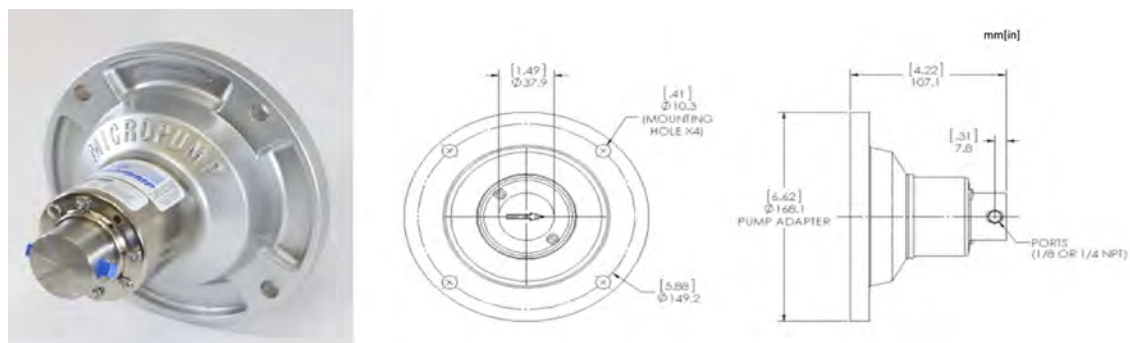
The GA-V23 pump head (left) with corresponding dimensions (right) [49].
